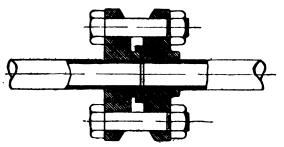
Complete flanged pipe coupling, fiber gasket type.
